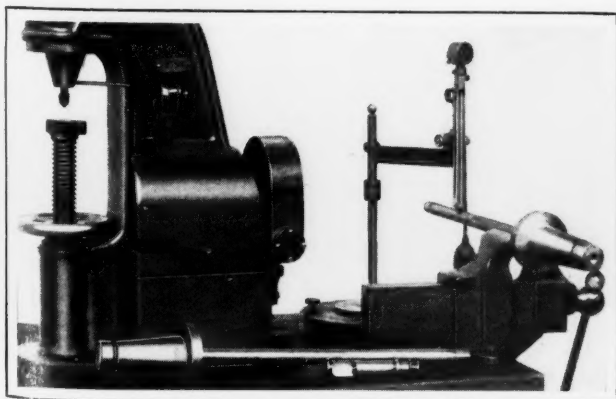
Brinell Testing Machine and Shore Scleroscope
